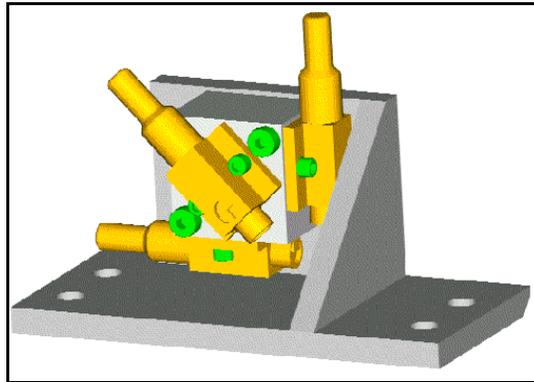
Tri-pack accelerometer assembled on mounting bracket
